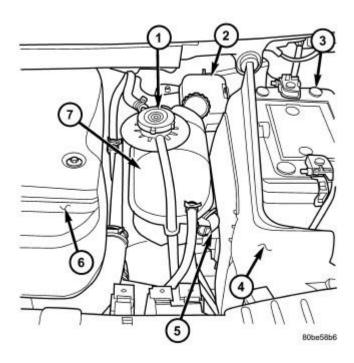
Coolant Recovery Container - Diesel Courtesy of CHRYSLER LLC
